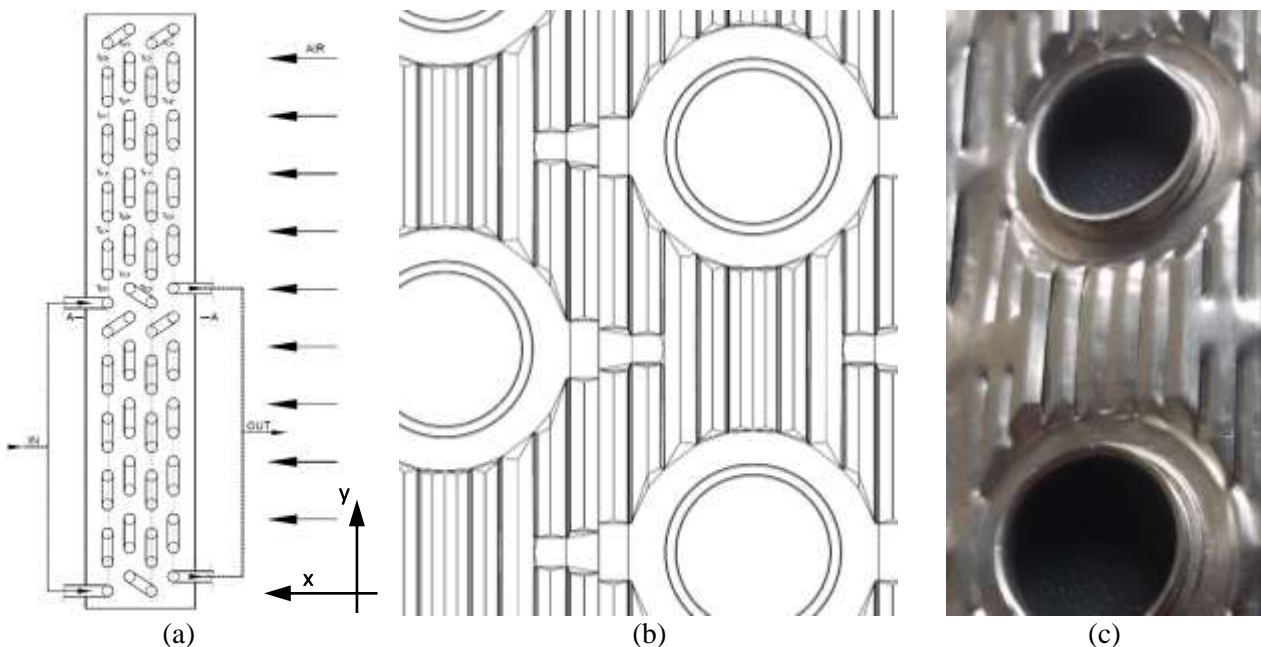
Heat Exchanger geometry: (a) tube arrangement; (b) fin geometry; (c) fin detail.
